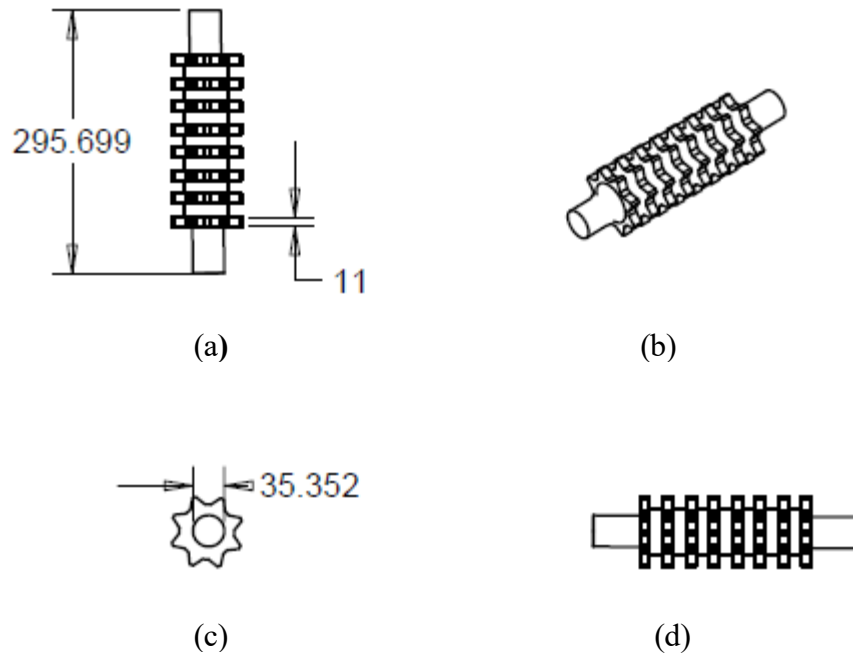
Feeding Roller (a) Top view, (b) Isometric view, (c) Front view and (d) Side view
